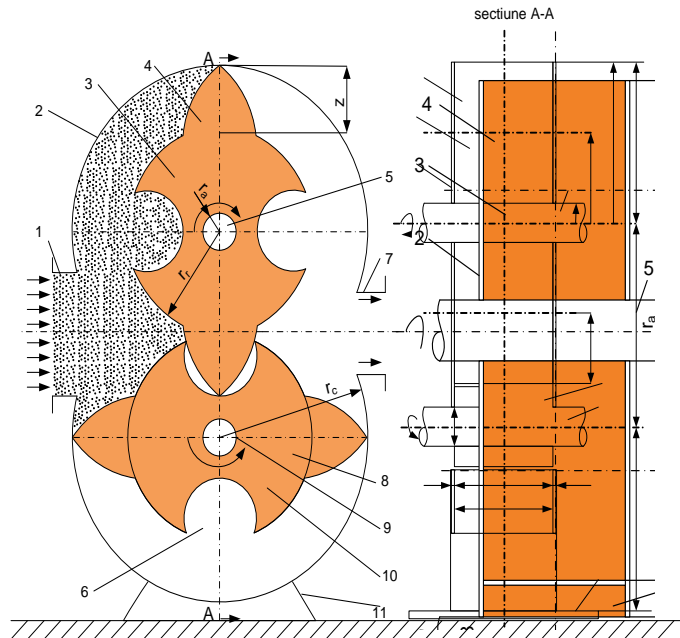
Cross section (a) and longitudinal section (b) through the rotating compressor 1-gas suction connection; 2-upper case; 3-upper rotor; 4- rotating piston; 5-driven shaft; 6-cavity; 7-gas discharge connection; 8-lower rotor; 9-driving shaft; 10-contact surface between the rotor and the case wall; 11-support
